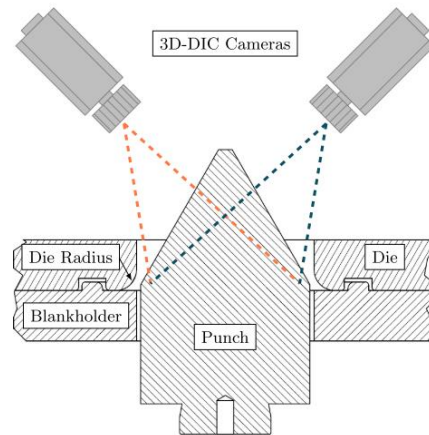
Cross-section view of the new experimental setup introducing draw beads and DIC system to the Hole Expansion Test.
